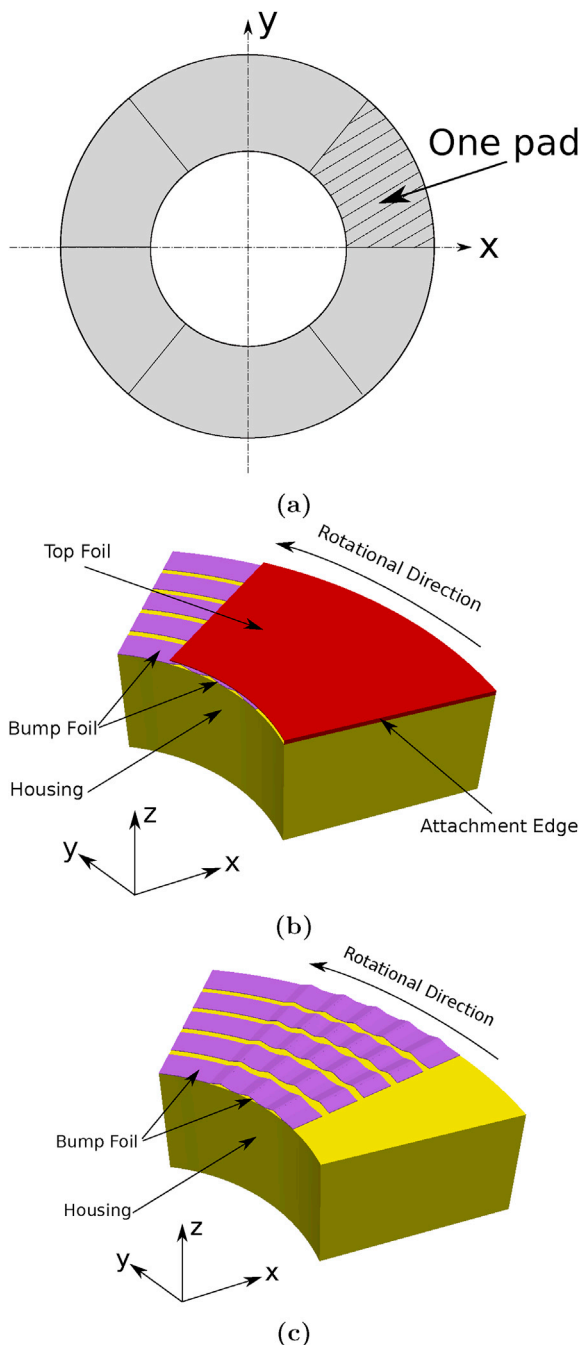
Schematic diagram of one pad of foil thrust bearings, not in scale, (a): front view; (b): one stator pad in three dimensional; (c): one stator pad with top foil removed in three dimensional.
